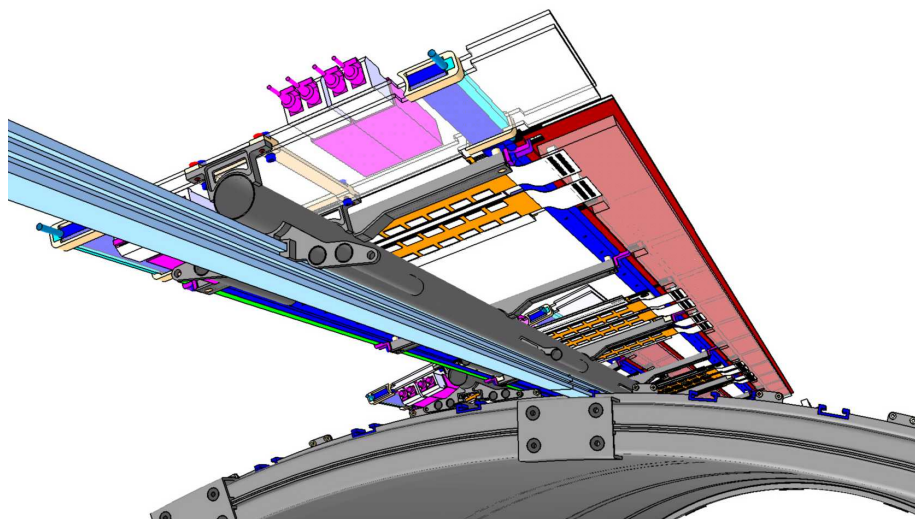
CAD model of a SM on a removable backbone rail being inserted into the GS.
